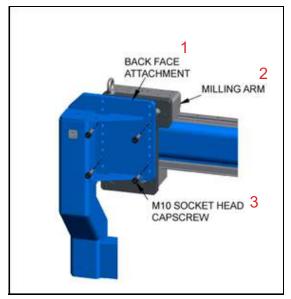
DETAIL OF ASSEMBLY OF BACK FACING ATTACHMENT
